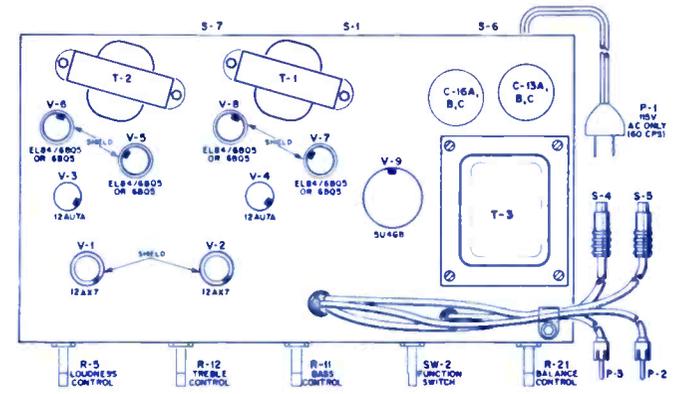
TUBE LOCATION AND ALIGNMENT POINTS CHASSIS 120509-B (AUDIO)
